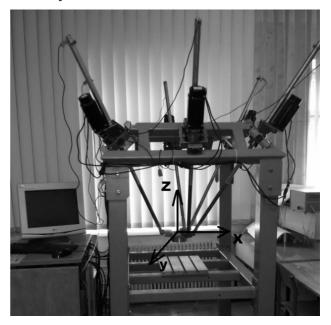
Machine-hexapod with installed 3D MEMS accelerometer
